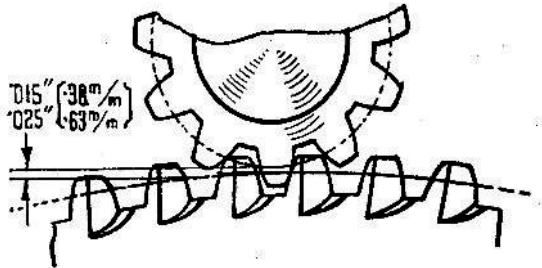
Mounting of Axial Starters (Flywheel Clearance).
